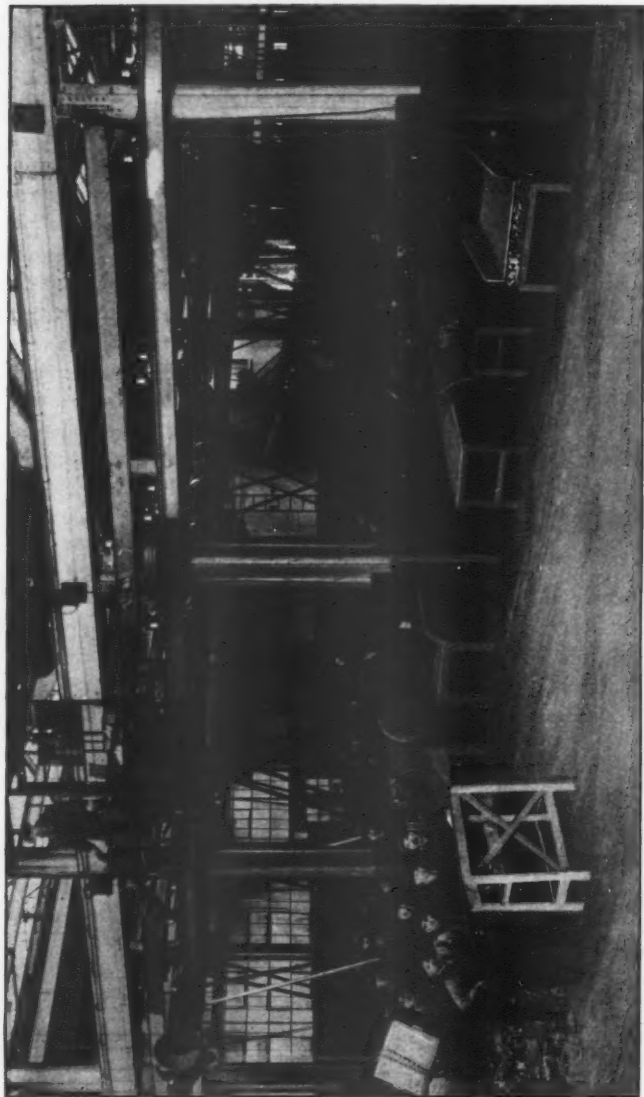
GRINDING AND SORTING ROOM OPERATED IN CONNECTION WITH THE TUMBLING MILL
